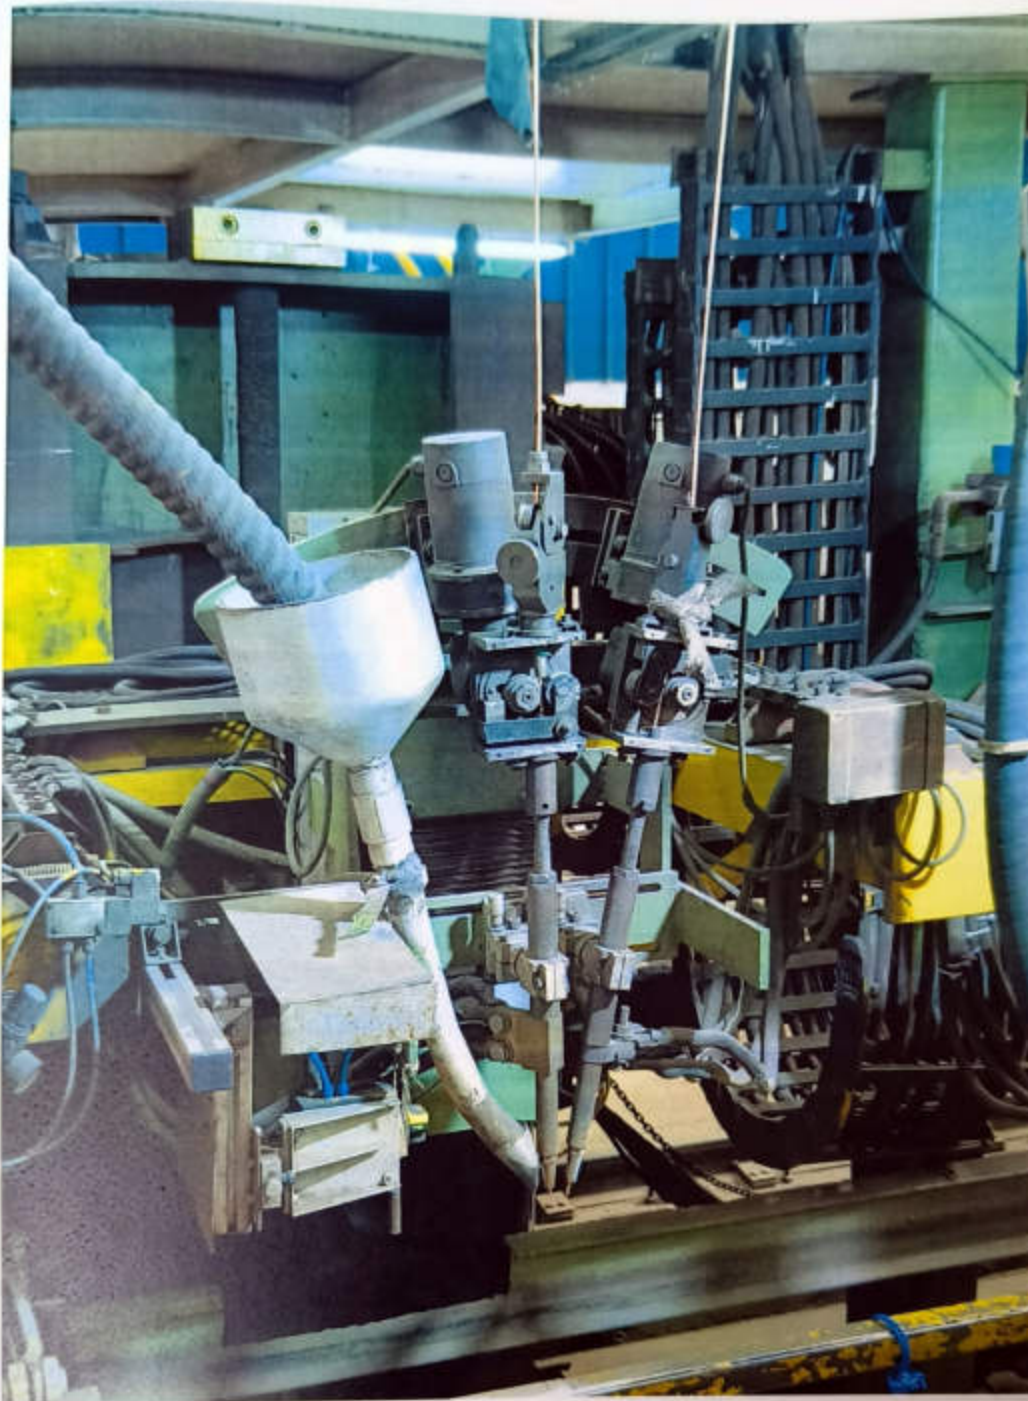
SAW welding arrangement courtesy of Jindal
